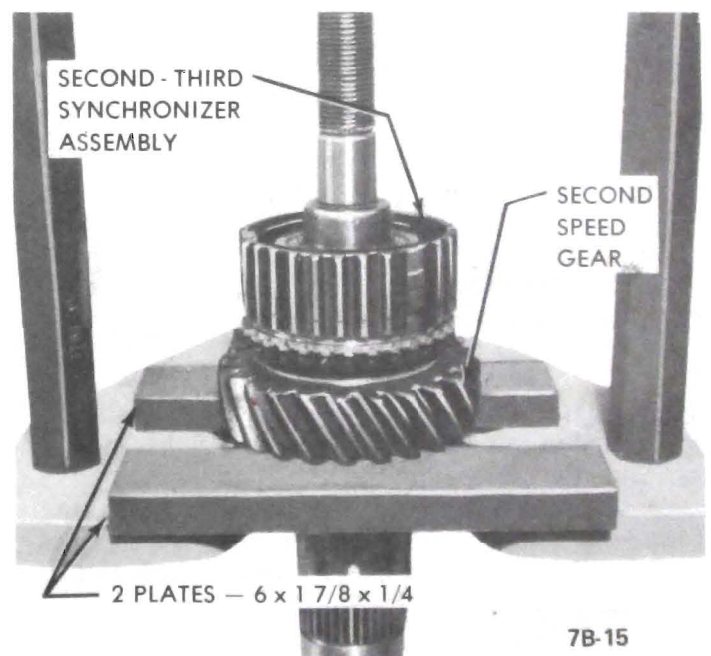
B-15 - Removing Second-Third Speed Synchronizer Assembly
